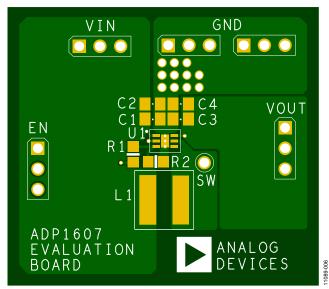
ADP1607 Boost Application Printed Circuit Board (PCB) Top Layer
